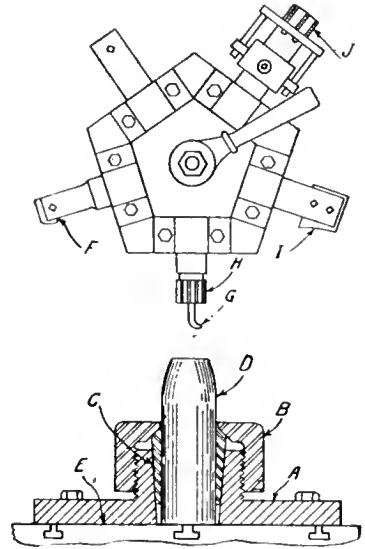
CHUCK AND HEAD ON "BULLARD" VERTICAL TURRET LATHE.
